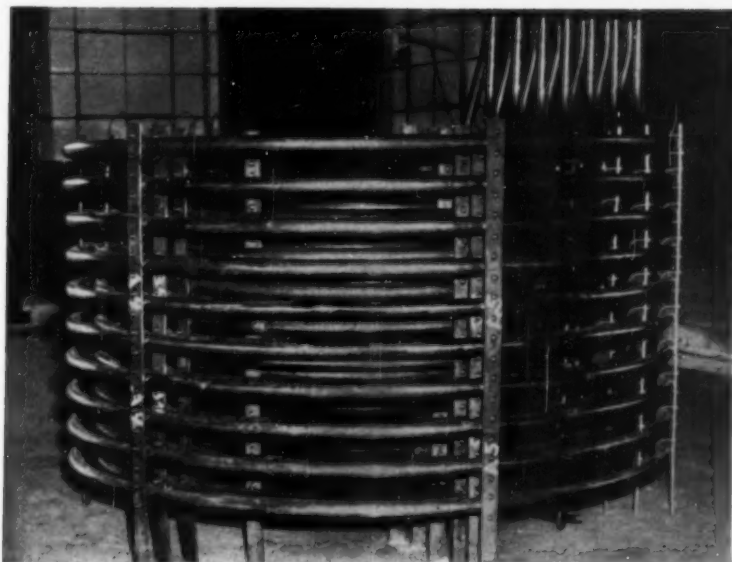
Nested heating and cooling coil assembly of Stainless Steel-Cupro Nickel duplex tubing.
